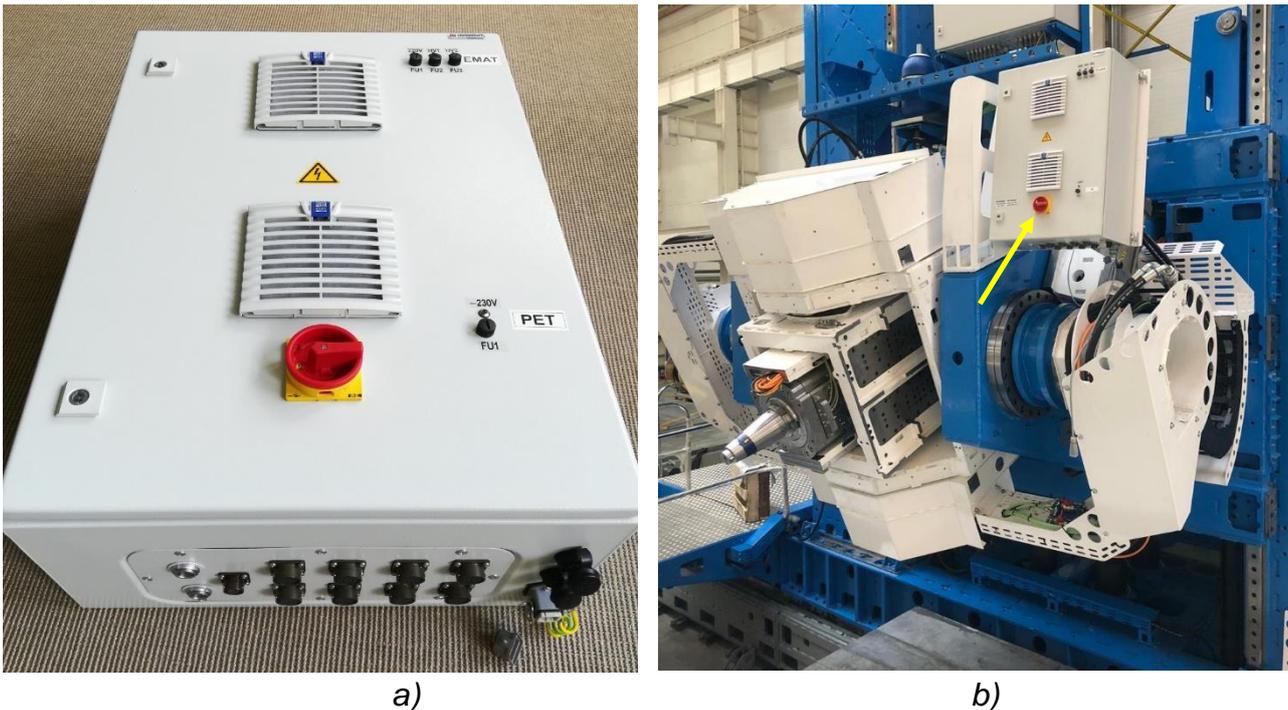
Test Electronics Unit. a) Overall view b) SONAFLEX-FSW as a part of friction stir welding machine
